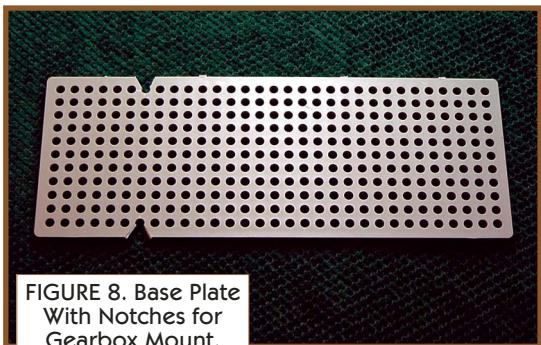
Base Plate With Notches for Gearbox Mount.
